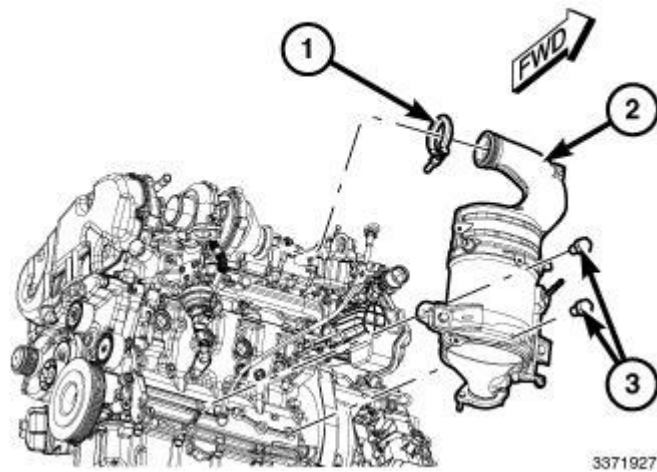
Clamp, Turbocharger & Two Attaching Bolts
